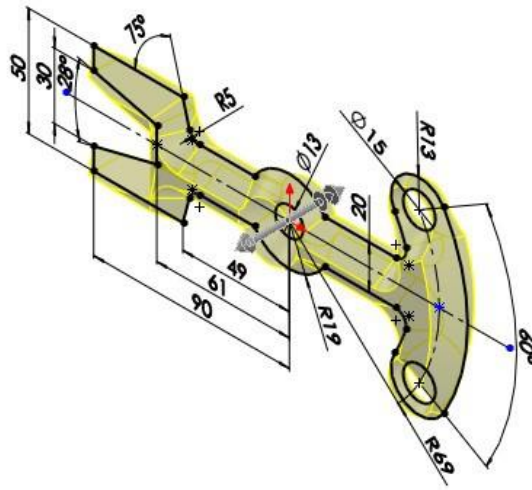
Sketch extruded using the Up To Body option
